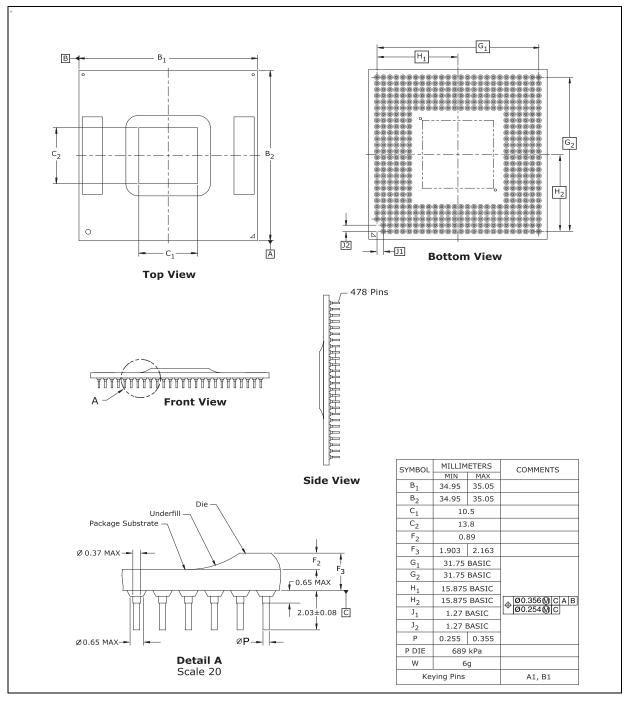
4-MB and Fused 2-MB Micro-FCPGA Processor Package Drawing (Sheet 2 of 2)
